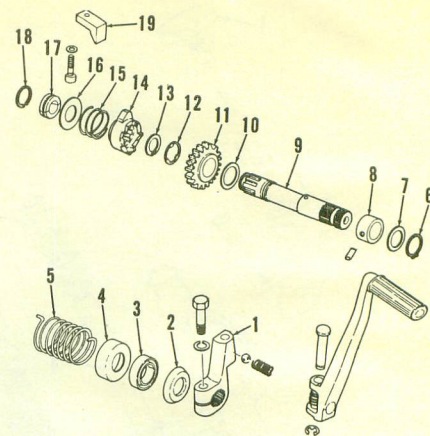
Exploded view of the kick starter assembly. Gear (11) meshes with first gear (19—Fig. Y8-22).
